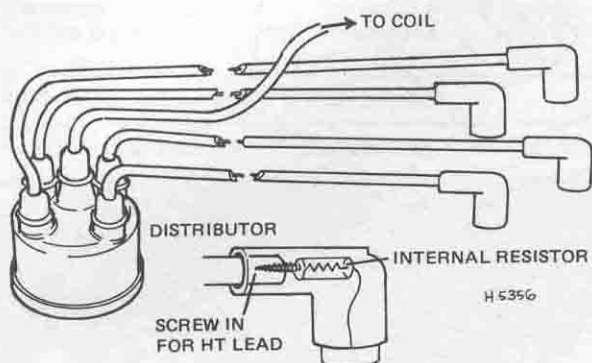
Ignition HT lead suppressors (Sec 55)
